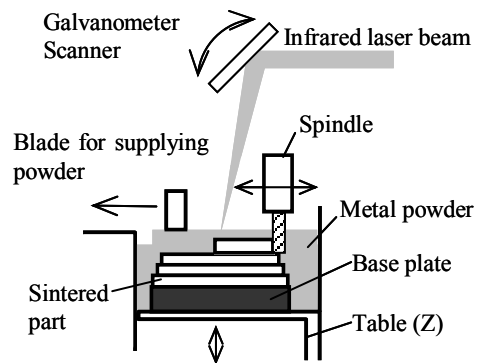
Components of the Milling-Combined Laser Metal Sintering System
